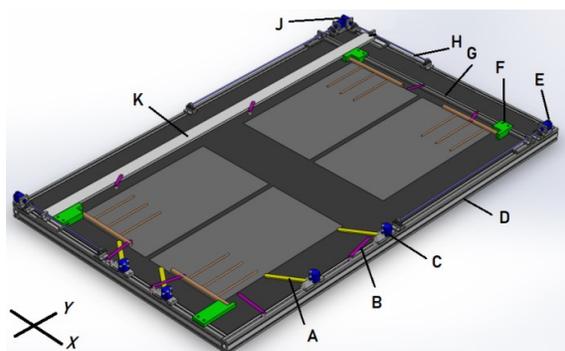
Designed fixture (solar absorber is only partly shown for simplicity); A – panel locator, B – pivot hold-down clamp, C – panel locator motor, D – frame, E&J – cartesian mechanism motor, F – corner locator, G – cartesian mechanism X bar, H – lead screw mechanism for K, K – cartesian mechanism Y bar).
